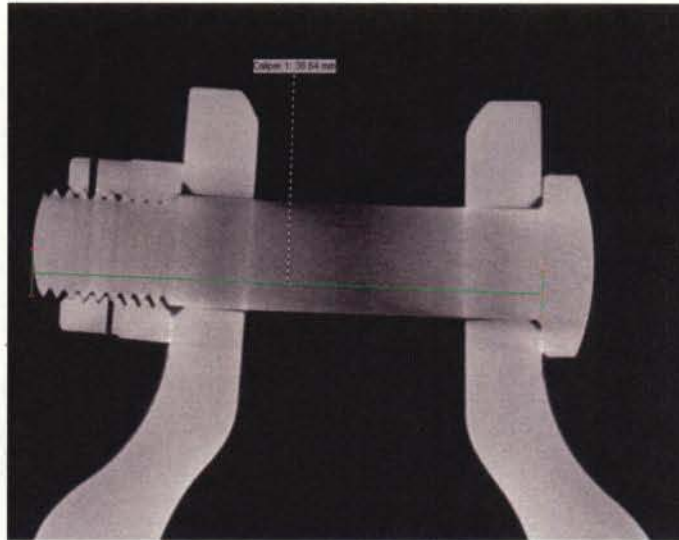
XX177 Drogue Shackle Bolt showing bottoming out of the threads of the nut.
